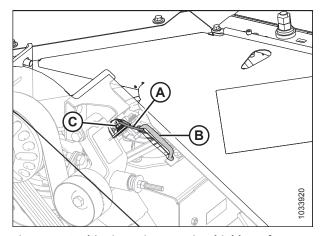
Shipping Wire on Driveshield – Left Side Shown
